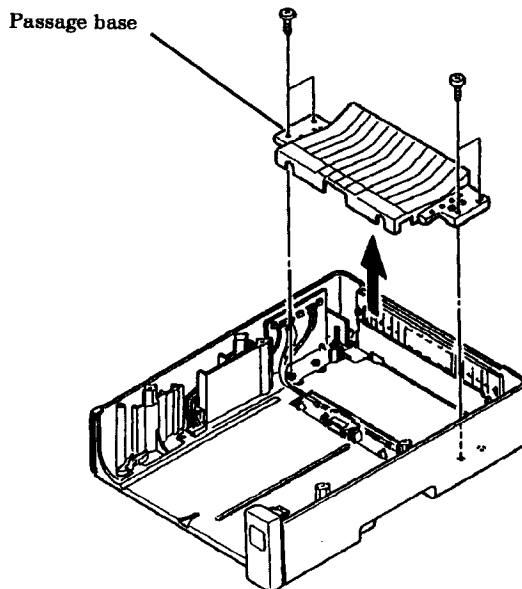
REMOVING THE PASSAGE ASSEMBLY
